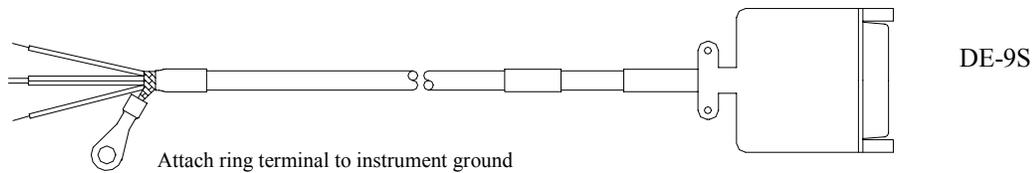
, Model 550/570 to Scanner/Keyboard Adapter Cable
